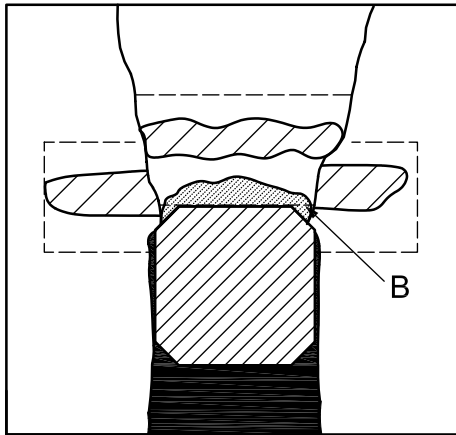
Ridge building and ridge failure adjacent to the structure
